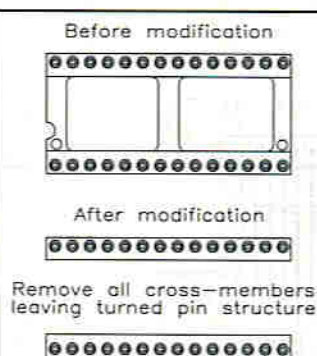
Modifying the DIL socket for the Sony CXA1645P chip.
